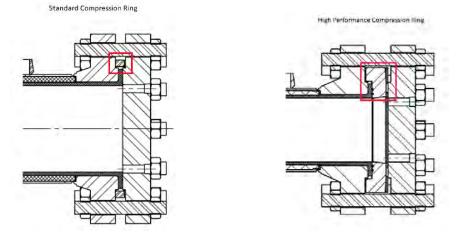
Flanged joint with a standard configuration ring Figure 7 Flanged joint with a High-Performance configuration ring
